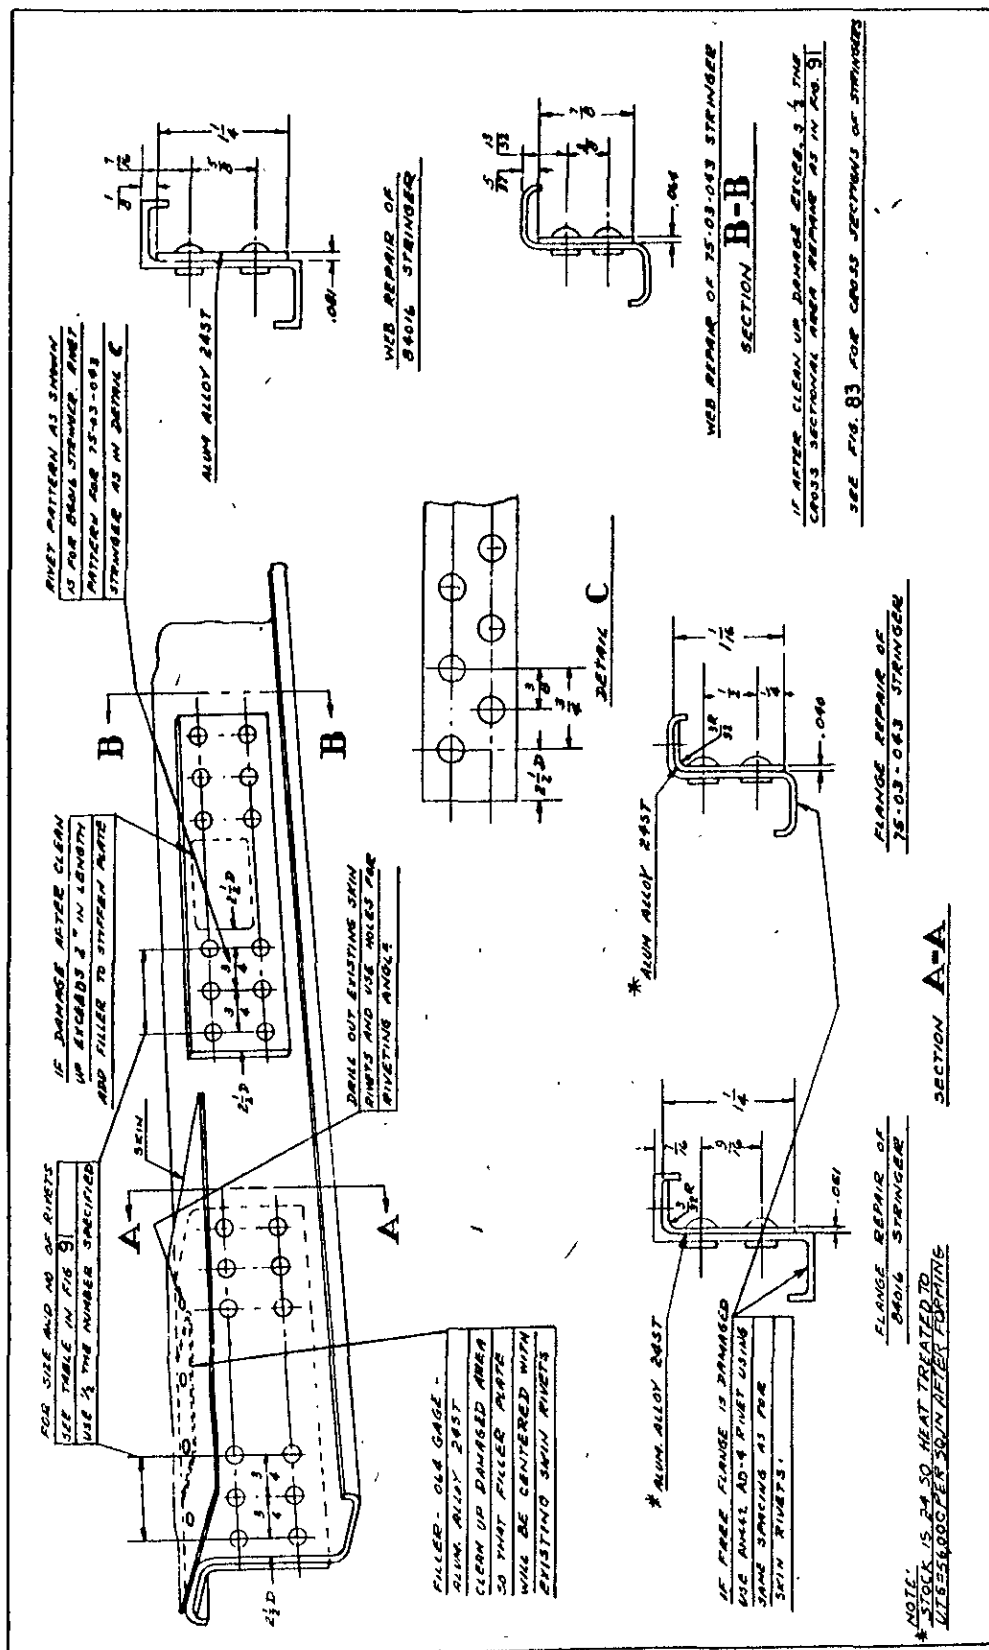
Wing Stringers - 84016 and 75-03-043 - Minor Damage
